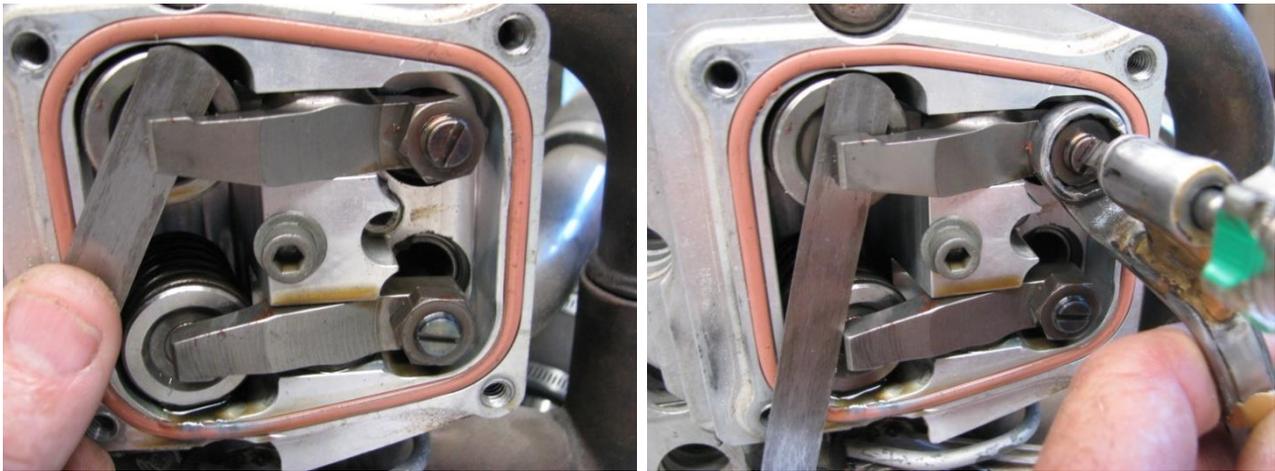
Valve Clearance Adjustment (Solid Lifter)
